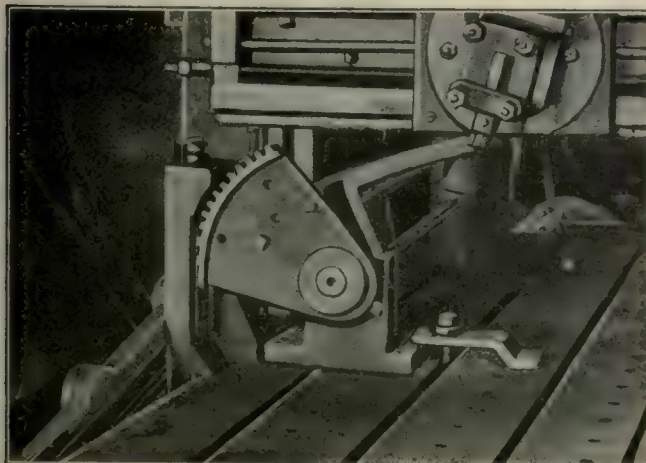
END VIEW, SHOWING SEGMENTAL GEAR AND RACK
